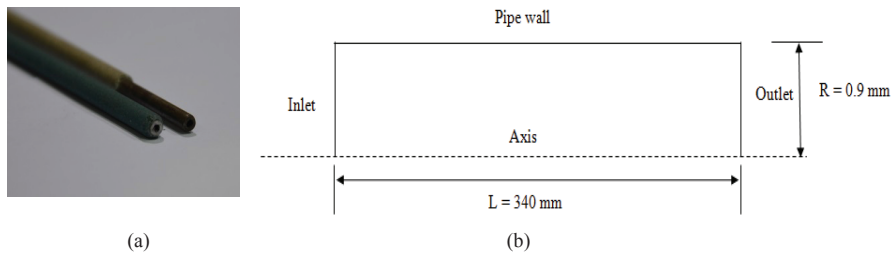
(a) Manufactured tubular welding electrode and (b) Schematic diagram of tubular welding Electrode with boundary region/ condition in axisymmetric geometry
